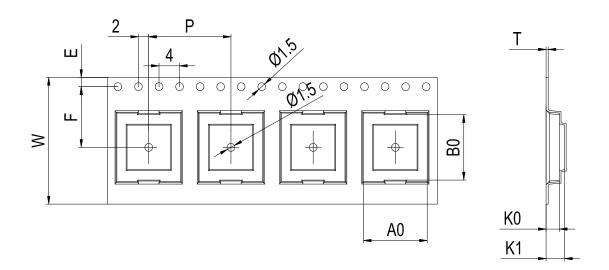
Carrier Tape Dimension Drawing (Unit: mm)
